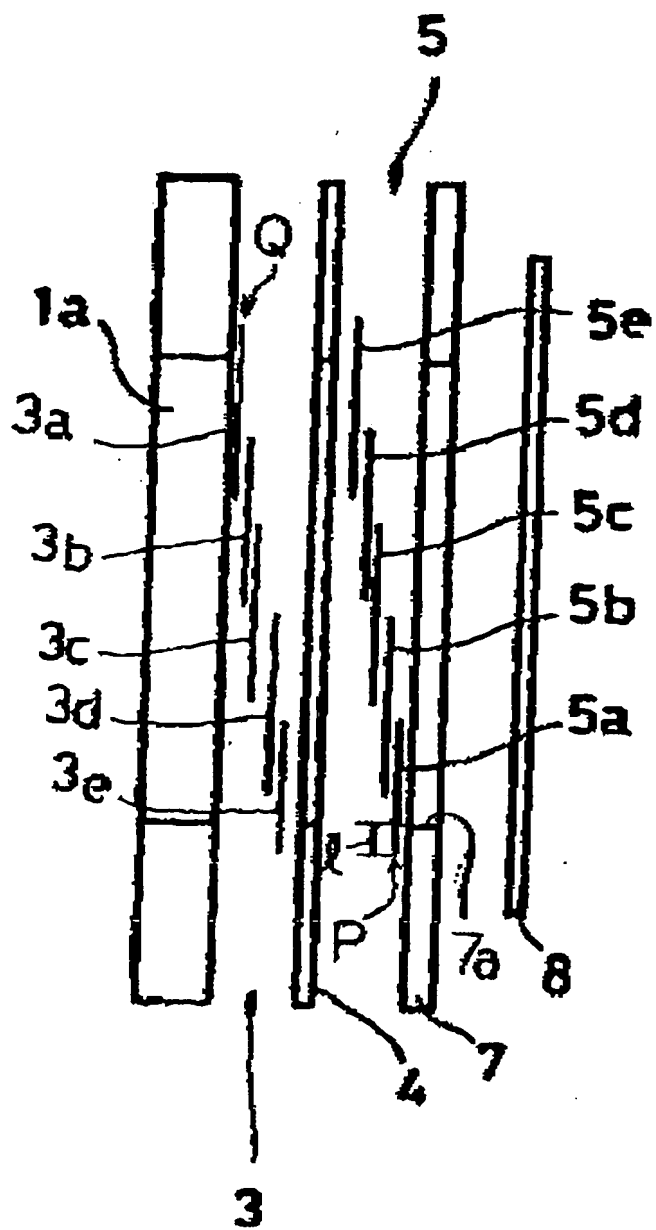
thru/or 5 are drawings showing one example of the focal plane shutter concerning this invention, and it is the graph which an open shutter unit shows the top view showing the condition that the decomposition perspective view of this focal plane shutter and Fig. 2 cover the sectional view of this shutter, and Fig. 3 has covered shutter opening, as for Fig. 1, and Fig. 4 with the sectional view of the shutter in front of exposure initiation actuation, and, as for Fig. 5, shows actuation of this shutter with the relation between shutter opening and time amount. Figs. 6 and 7 are drawings showing other examples of the focal plane shutter concerning this invention, and the top view in which, as for Fig. 6, an open shutter unit shows the condition of having covered shutter opening, and Fig. 7 are sectional views of this shutter. Figs. 8 and 9 are drawings showing the conventional focal plane shutter, and it is the graph which Fig. 8 shows actuation of this shutter with the sectional view of this shutter, and shows Fig. 9 with the relation between shutter opening and time amount.
